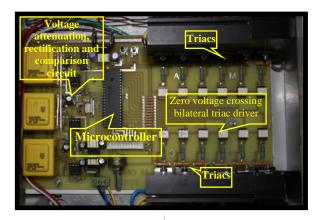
The printed circuit board of designed starter and protection relay and its layout of the elements.
